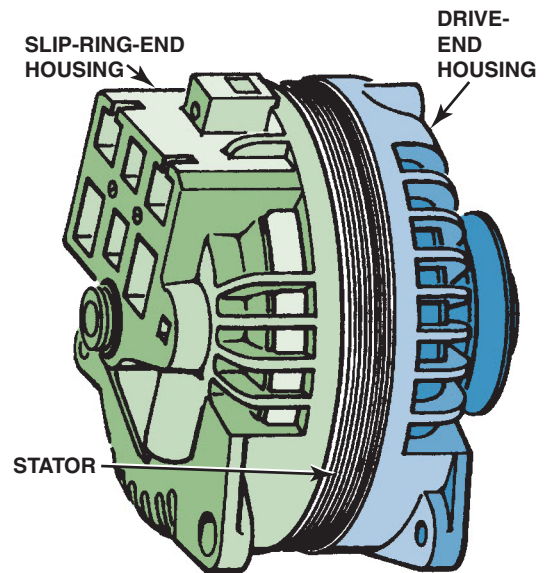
The end frame toward the drive belt is called the drive-end housing and the rear section is called the slip-ring-end housing.
